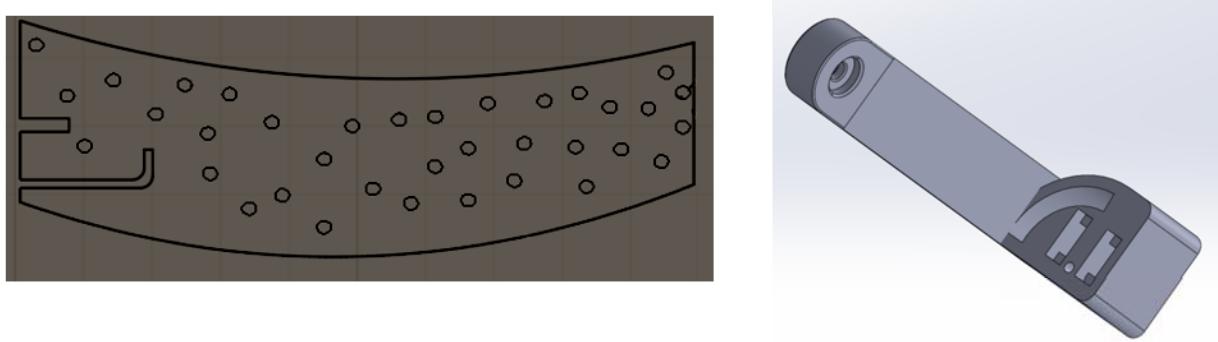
Penguin wing spline drawing (left), and CAD drawing of the shoulder (right).
